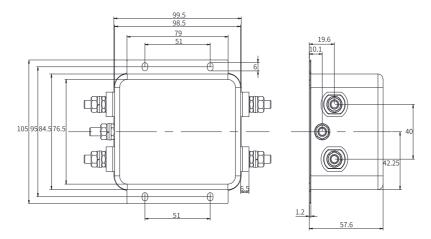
Filter dimensions (FN2010N-60-24) (unit: mm)
